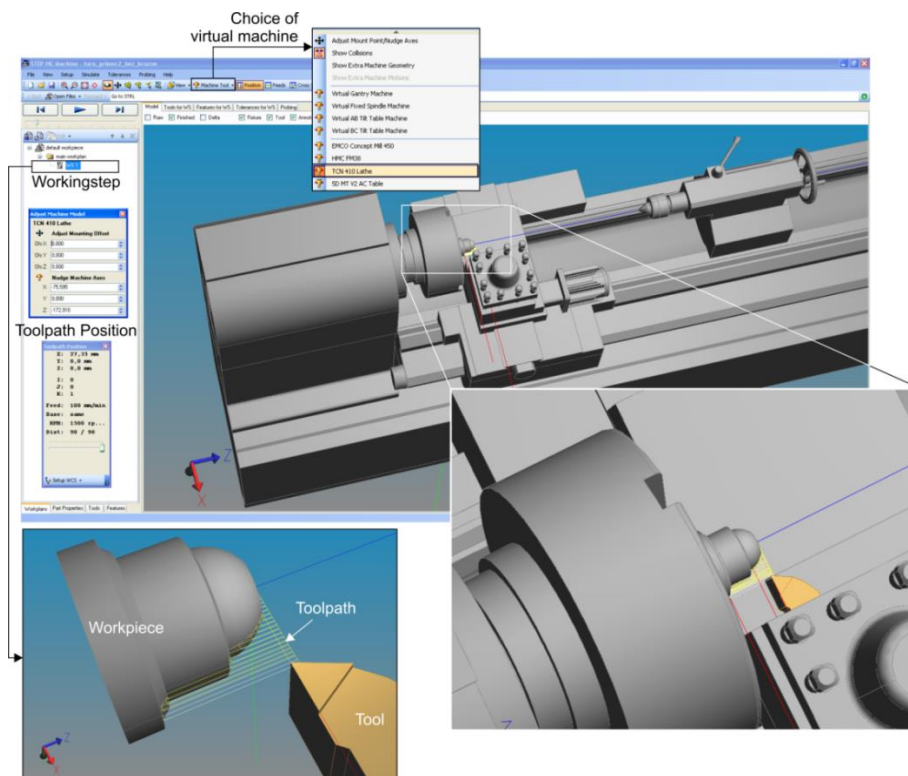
Virtual CNC Lathe TCN410 in STEP-NC Machine
